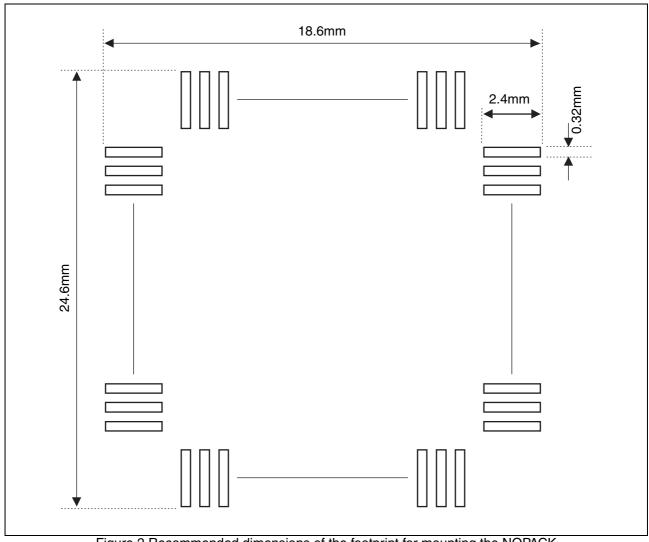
Recommended dimensions of the footprint for mounting the NQPACK
